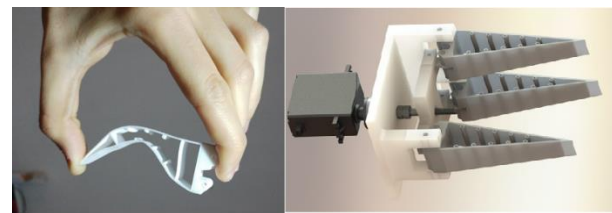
a) Flexible finger, b) Manufactured gripper with three fingers.
